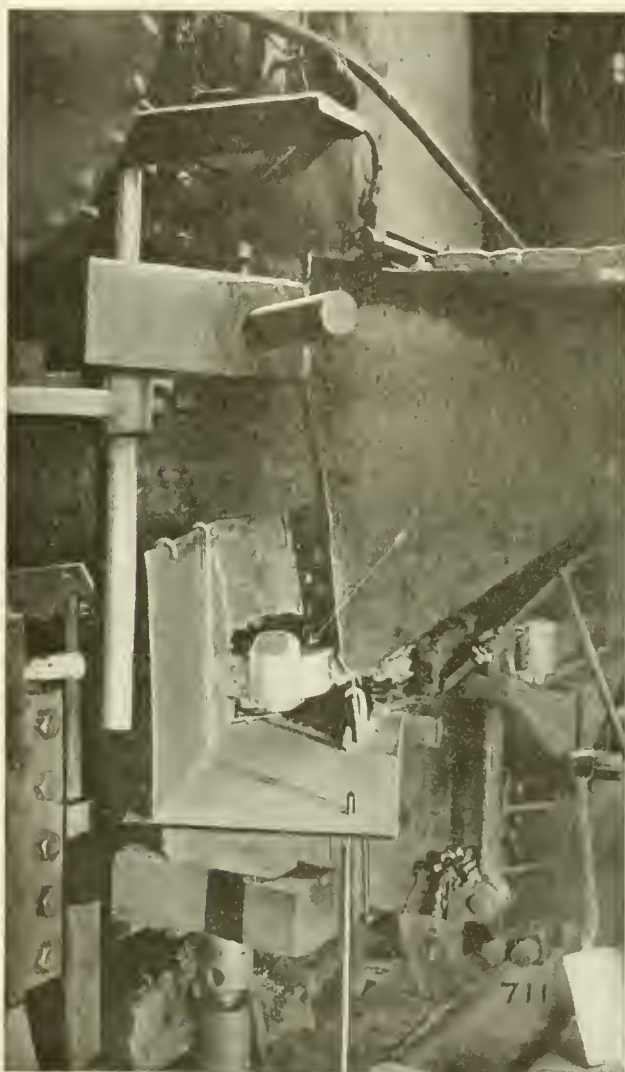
WAX IN PLACE FOR WELDING MUD RING ON LOCOMOTIVE.
